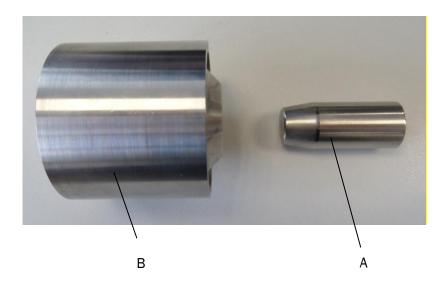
Assembly tools assembly cone (A) and assembly anvil (B)
